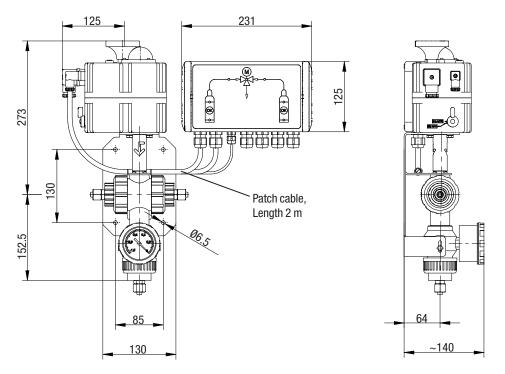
Dimensioned drawing C 7523 as assembly kit
